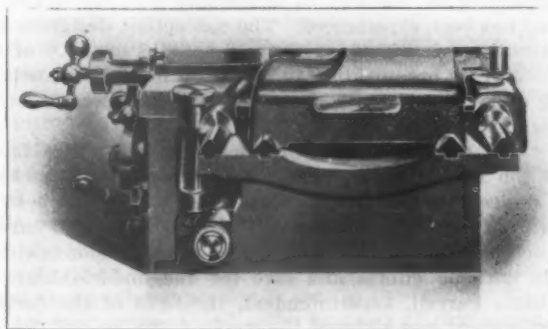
Osgood Patent Drawn Tool Steel Guides as Applied to a Lathe Bed.
